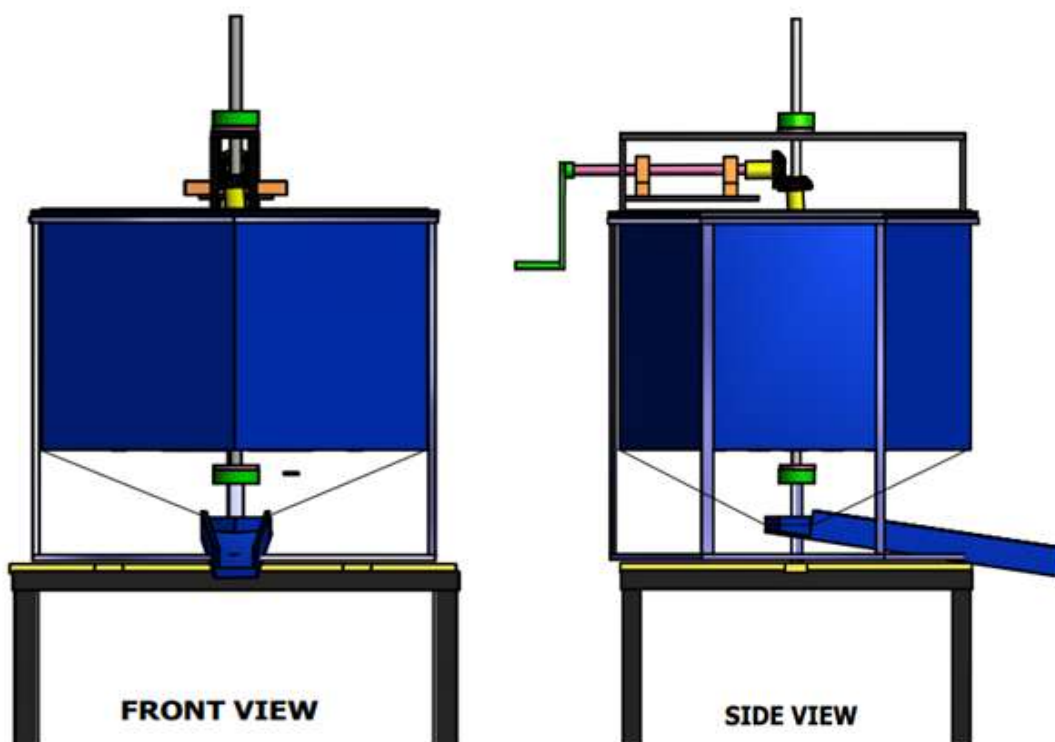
Front and Side view Assemble of Hexagonal Drum Honey Extractor
